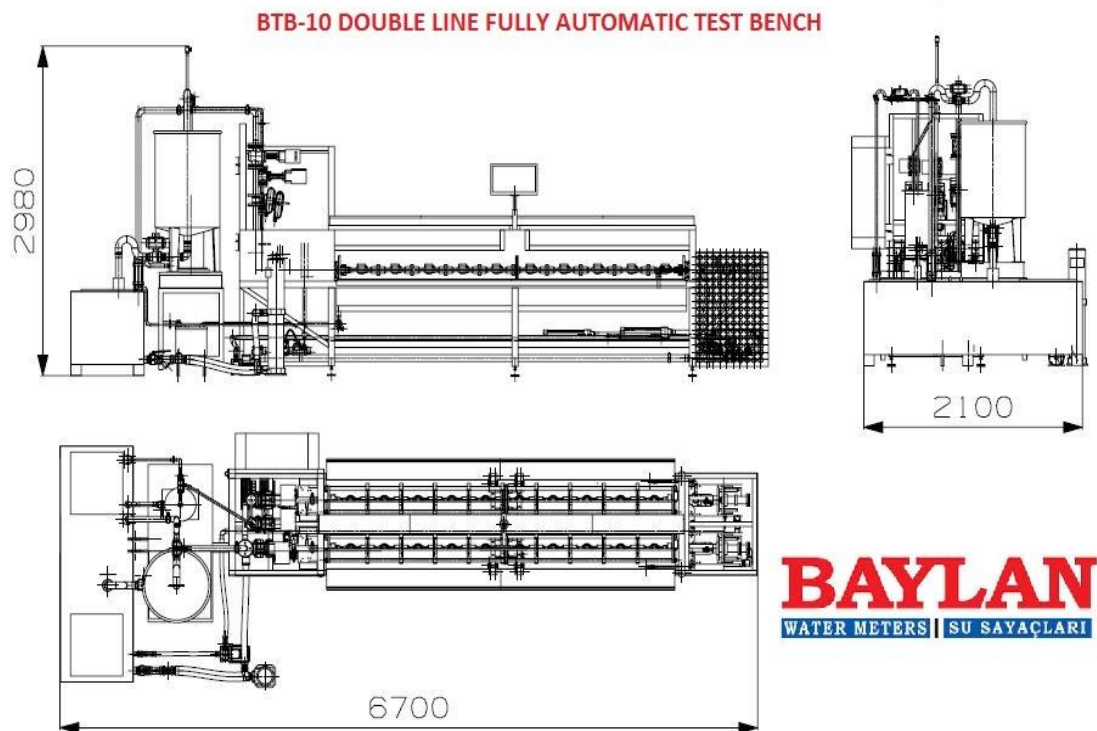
BTB-10 Double Line Test Bench Dimensioned Technical Drawing
